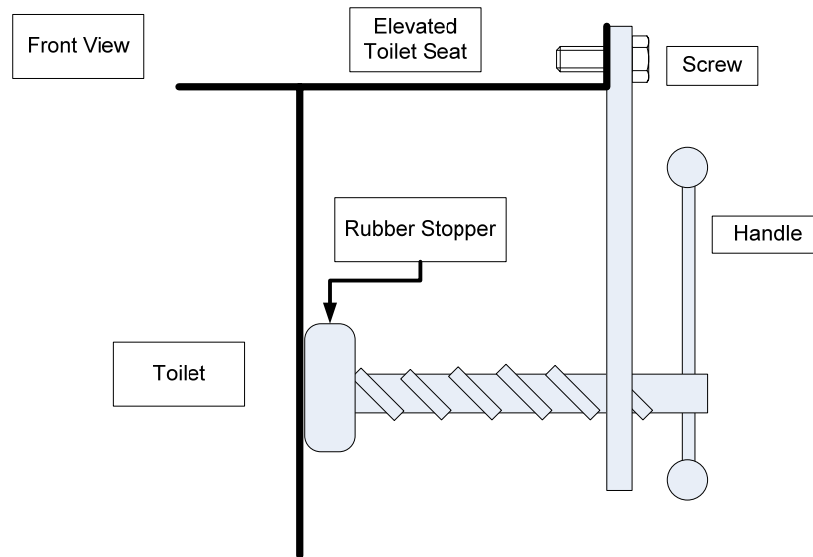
Fastening Mechanism for Elevated Toilet Seat
